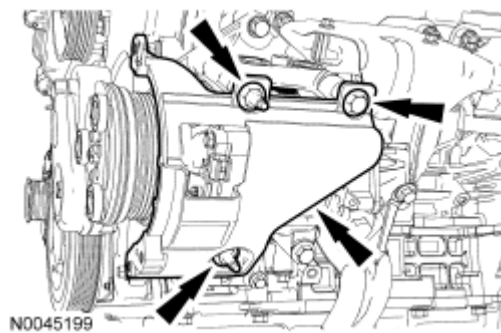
Locating A/C Compressor Shield Nuts & Bolt
